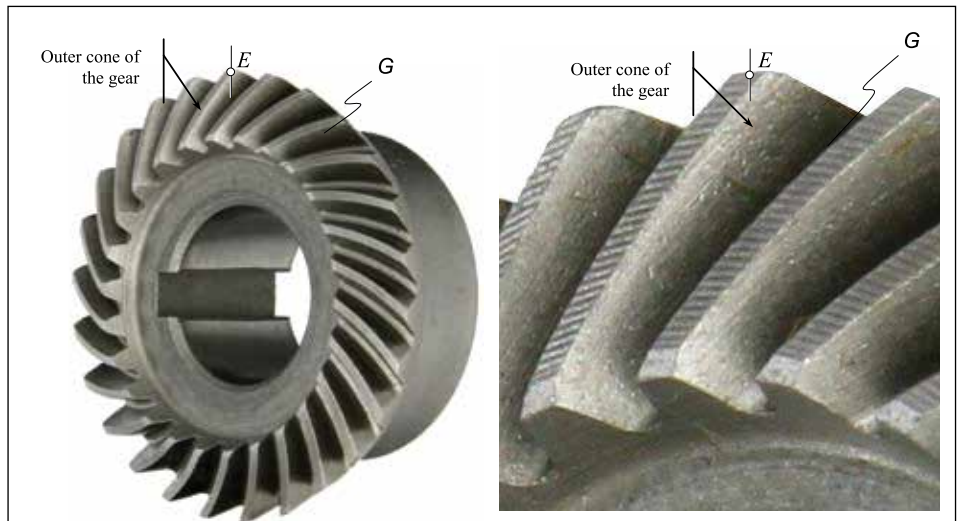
"Crown" in intersected-axes and crossed-axes gears. Note on rough surface of the outer cone of the gear; this rough surface is used to specify the crown, E; that is, it is used to specify the crown to back, F, and ultimately the mounting distance, M.
